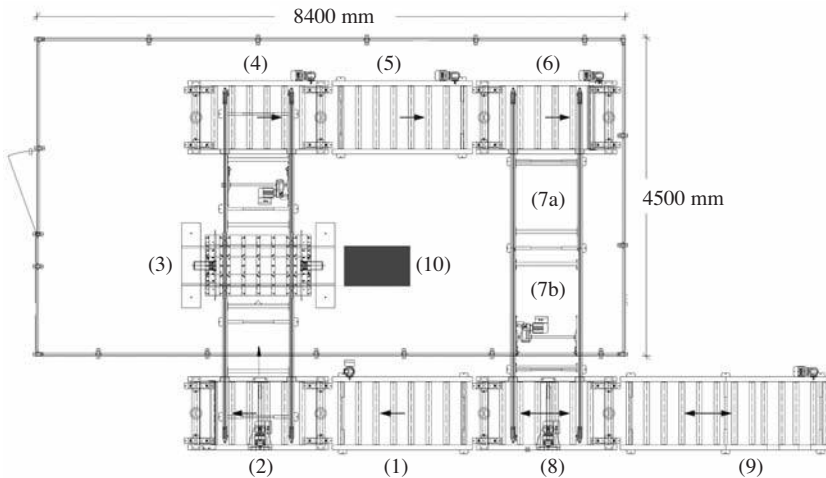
Layout of the line for solid wood bending and the different positions of the mold (1-9). (1) Loading of the mold; (2) Changing the direction of the mold; (3) HF-Press: heating, bending and drying; (4) Changing the direction of the mold; (5-7b) Waiting stations; (8) Unloading of the bent wood; (9) Storage for the molds; (10) HF-generator.
